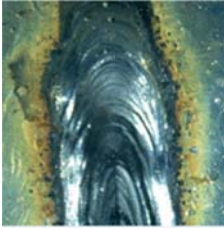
Common laser welding defects during laser welding of galvanized steel
